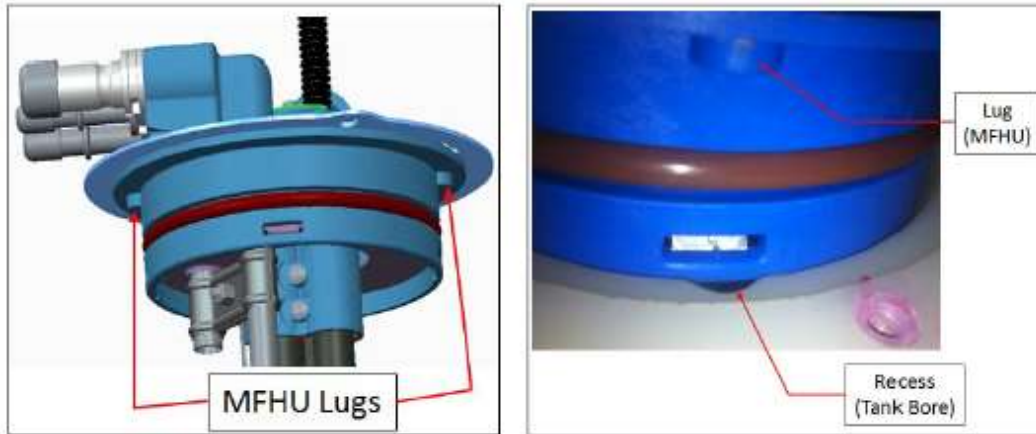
Align MFHU lugs with the recesses on the tank bore during re-assembly.
